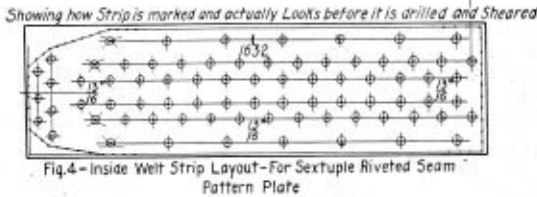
Inside Welt Strip Layout-For Sextuple Riveted Seam Pattern Plate
